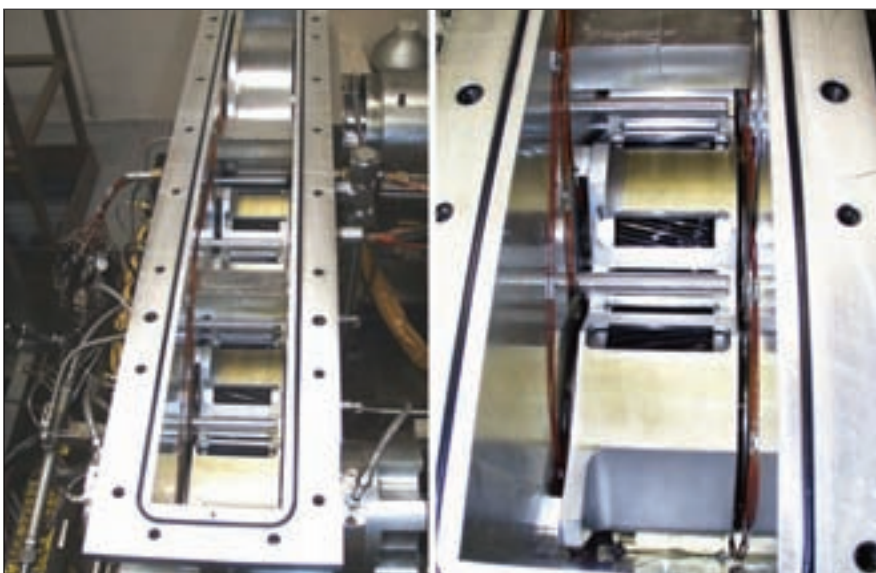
Photographs of shrouding on the test gearbox. Left: entire gearbox. Right: close-up of the input-1st idler gear shrouds.
